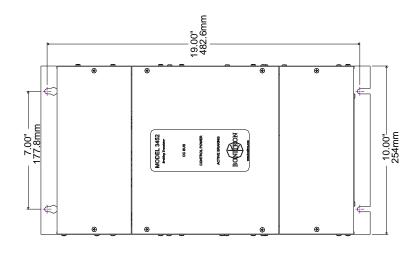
M3452 K10 Chassis Dimensional Outline Drawing
